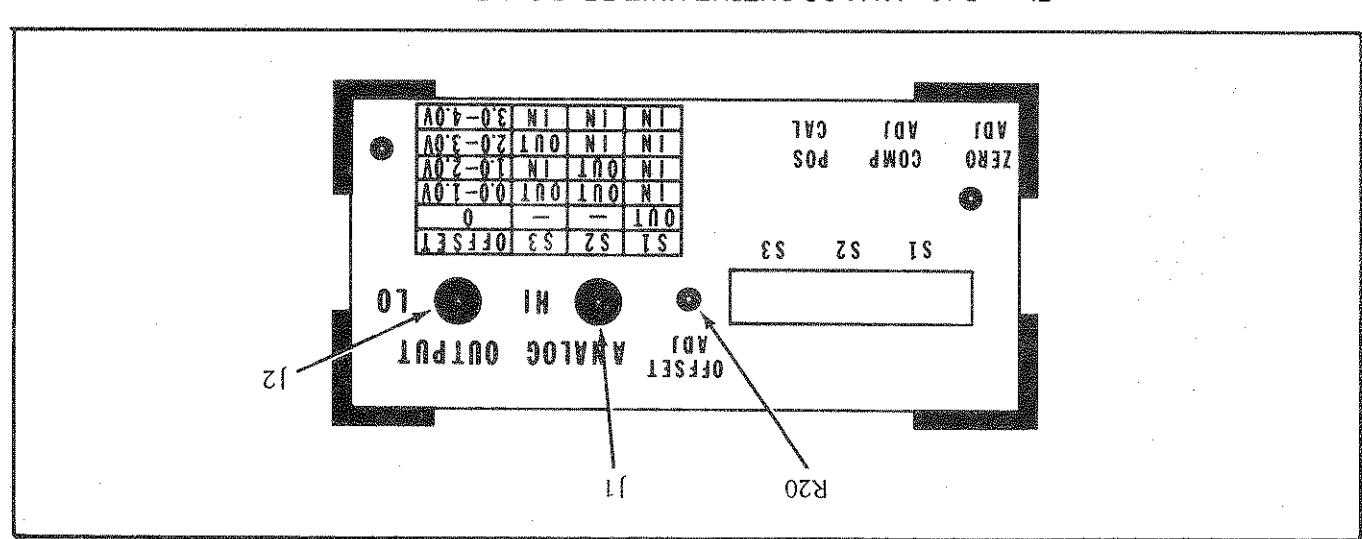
ANALOG OUTPUT UNIT REAR PANEL ASSEMBLY.
